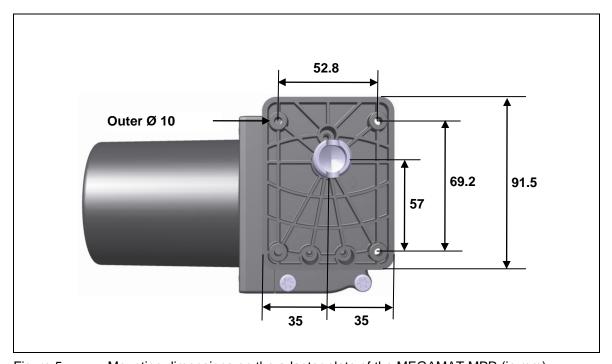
Mounting dimensions on the adapter plate of the MEGAMAT MPR (in mm)
